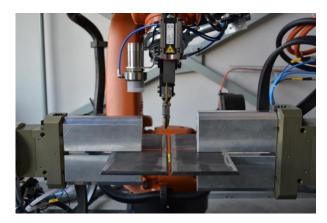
Robotic positioning of to-be-welded parts in a prototype robotic workplace. Position before weld gap correction from data obtain by 2D laser scanner.
